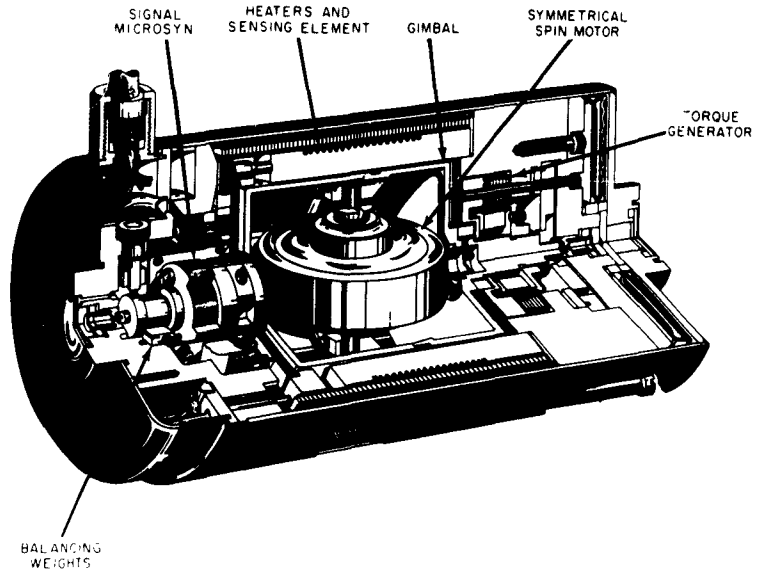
Cutaway of HIG-6 showing arrangement of major sections of "floated" gyroscope (Minneapolis-Honeywell photo)
